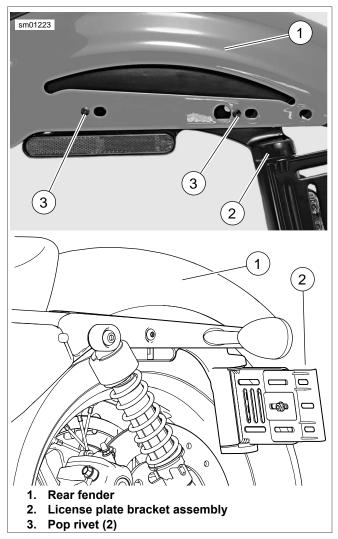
Removing/Installing License Plate Bracket Assembly (domestic)
